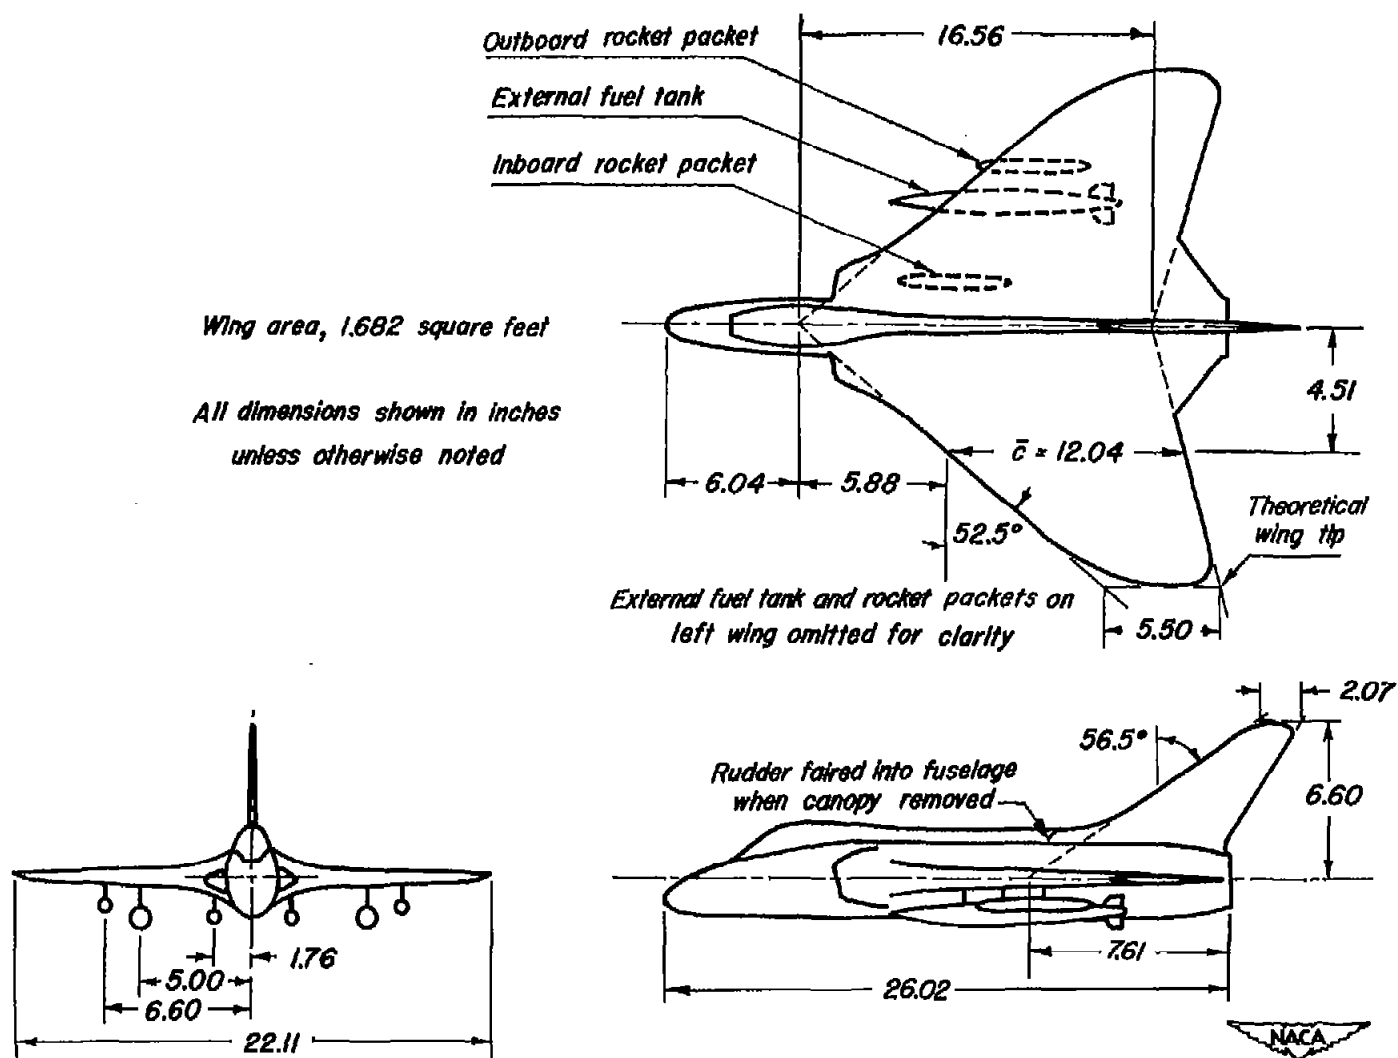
Three-view drawing of the model showing the external fuel tanks and rocket packets.
